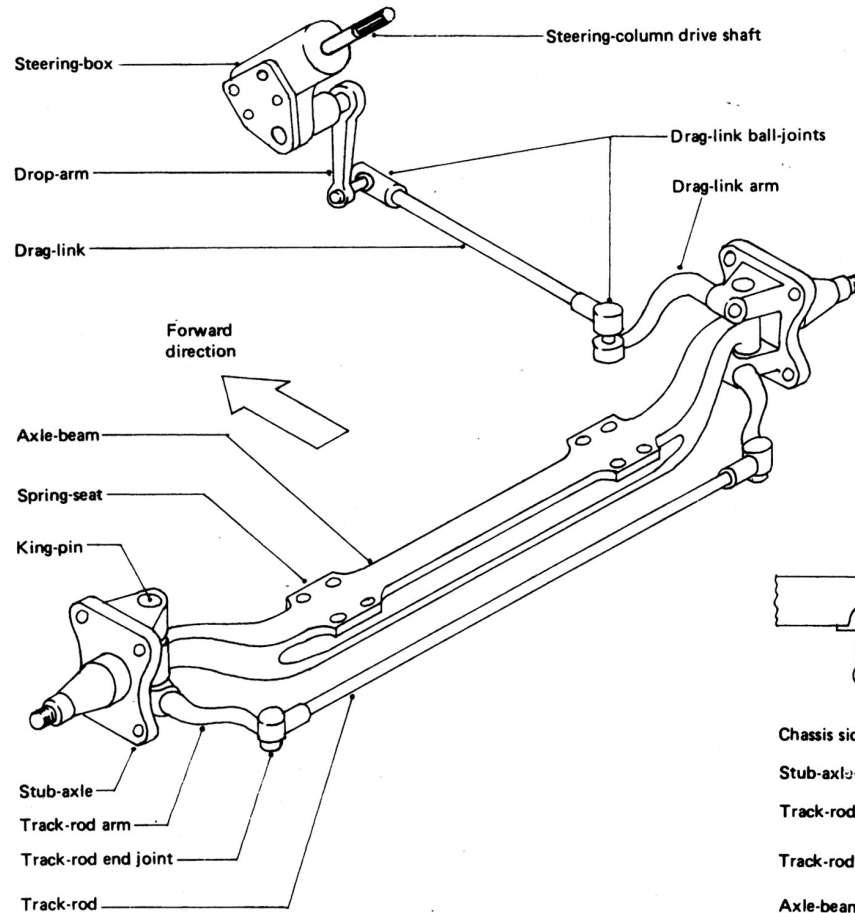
Pictorial view of a typical axle-beam steering-linkage layout
